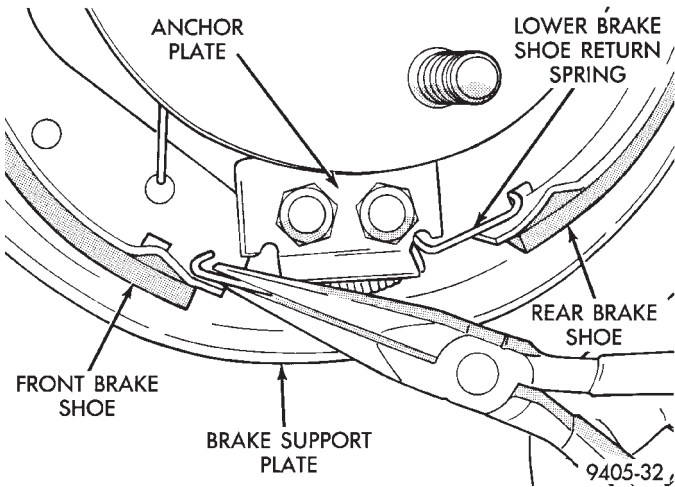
Remove/Install Brake Shoe Lower Return Spring
